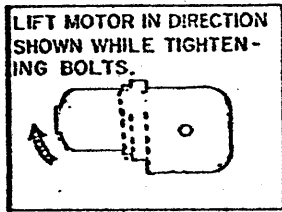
Main Drive Motor and Gear Box Assembly Replacement
